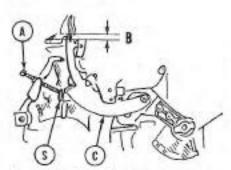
Schematic view of speed control mechanism used on late models. Clearonce (B) should be 1/4 inch. See also Fig. Mc79.
